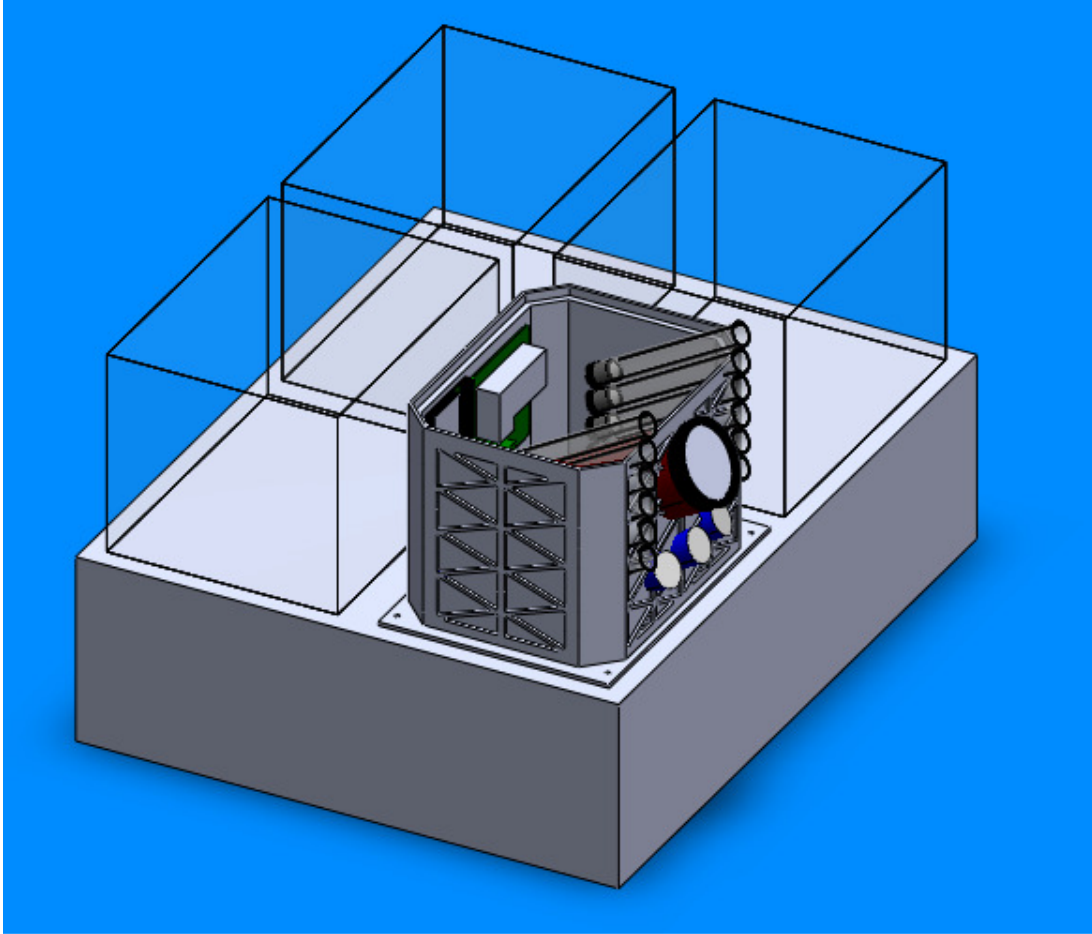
A zoomed out view of the HASP payload and where BOWSER could be situated.
